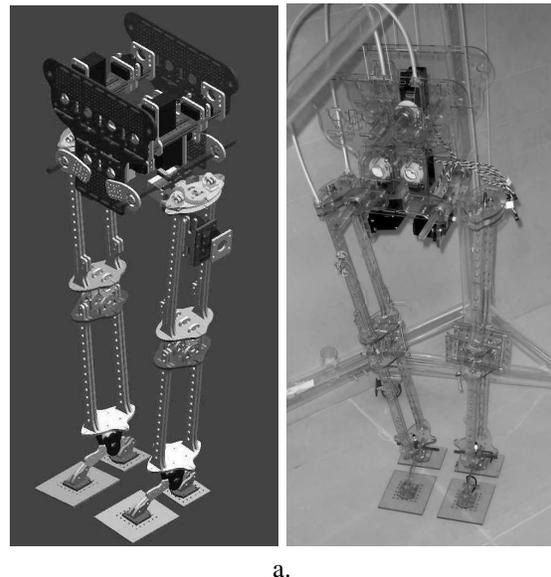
(a) The 3D cad assembly of the robot. (b) The prototype, here with only one leg actuated.
